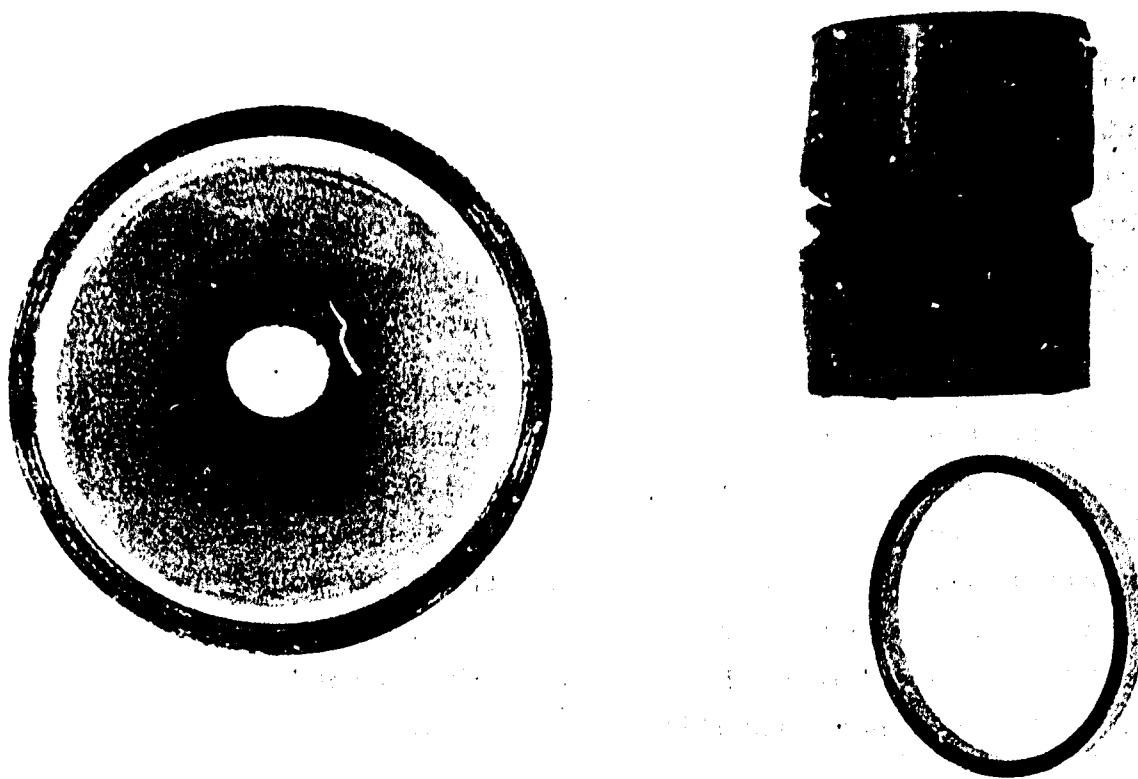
Left: Top View of Polyethylene Driven Cylinder and Expanded Aluminum Ring. Right: Side View.
